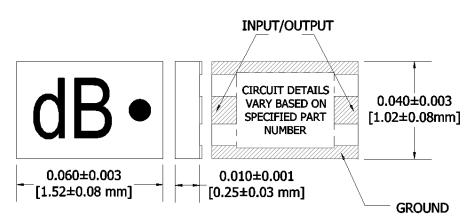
2D Drawings for TSXDB.00 - Mechanical Footprint
